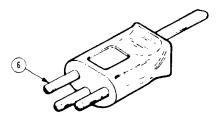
ACCESSORIES Replaceable Parts - 11402 Service
